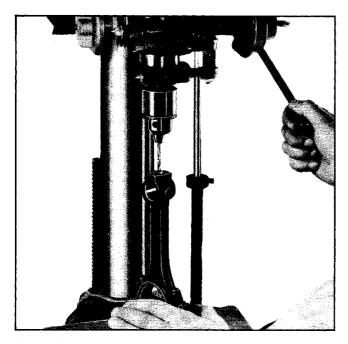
Drilling Oil Hole in Connecting Rod Bushing
